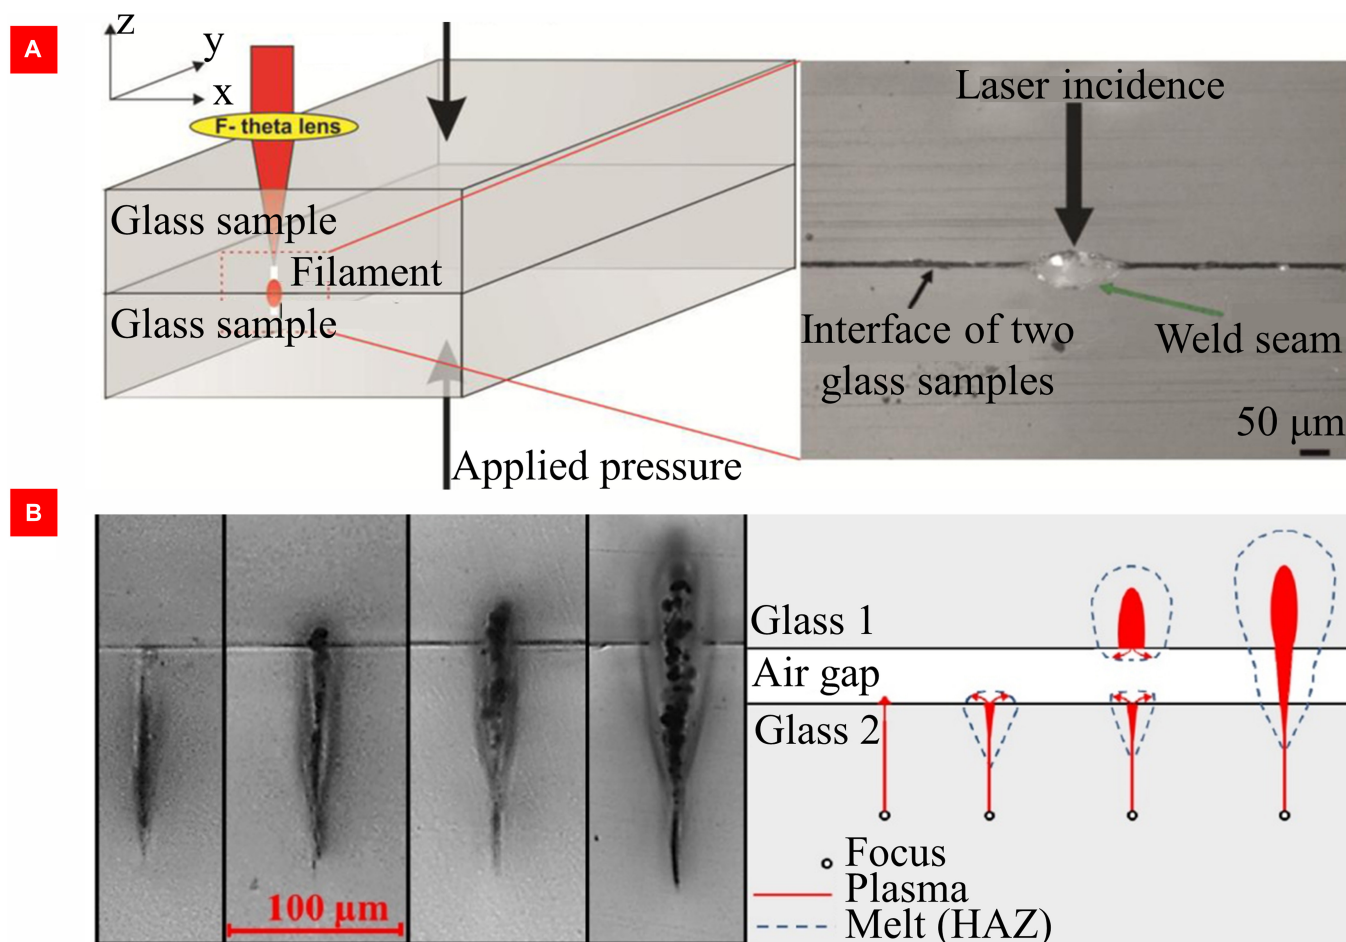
(A) Schematic diagram of filametary welding and actual weld seam [125]. (B) Cross-sections of different welding patterns at different focal positions and illustration of mechanism [128].
